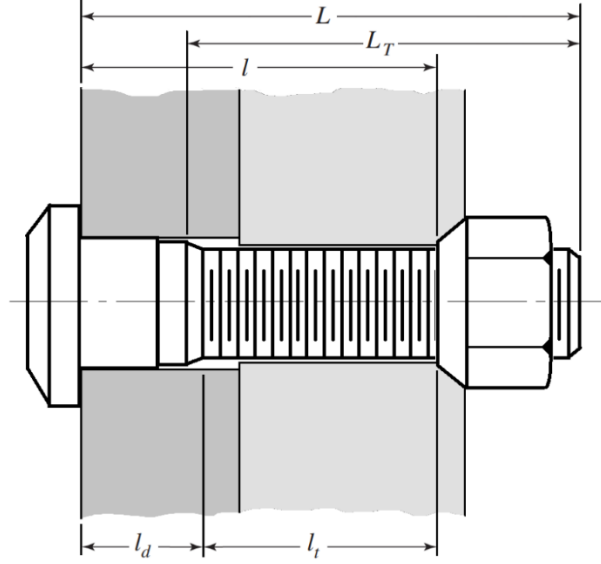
Wheel stud and lug nut clamping wheel hub and wheel rim.
